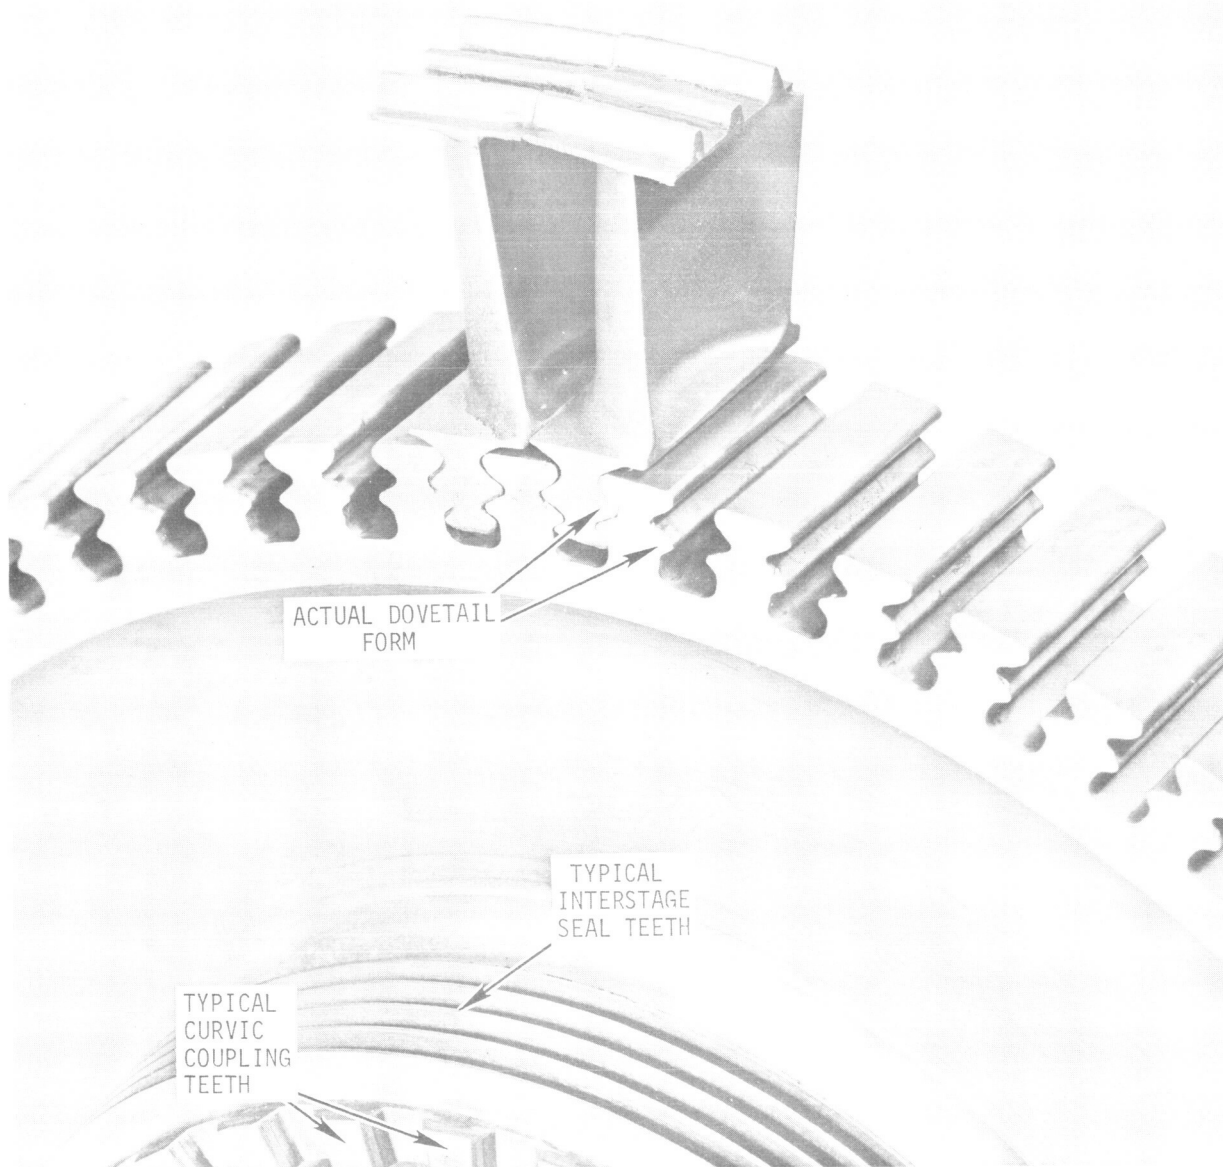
Mock-Up of Shrouded Rotor Blade. (C66111107)
